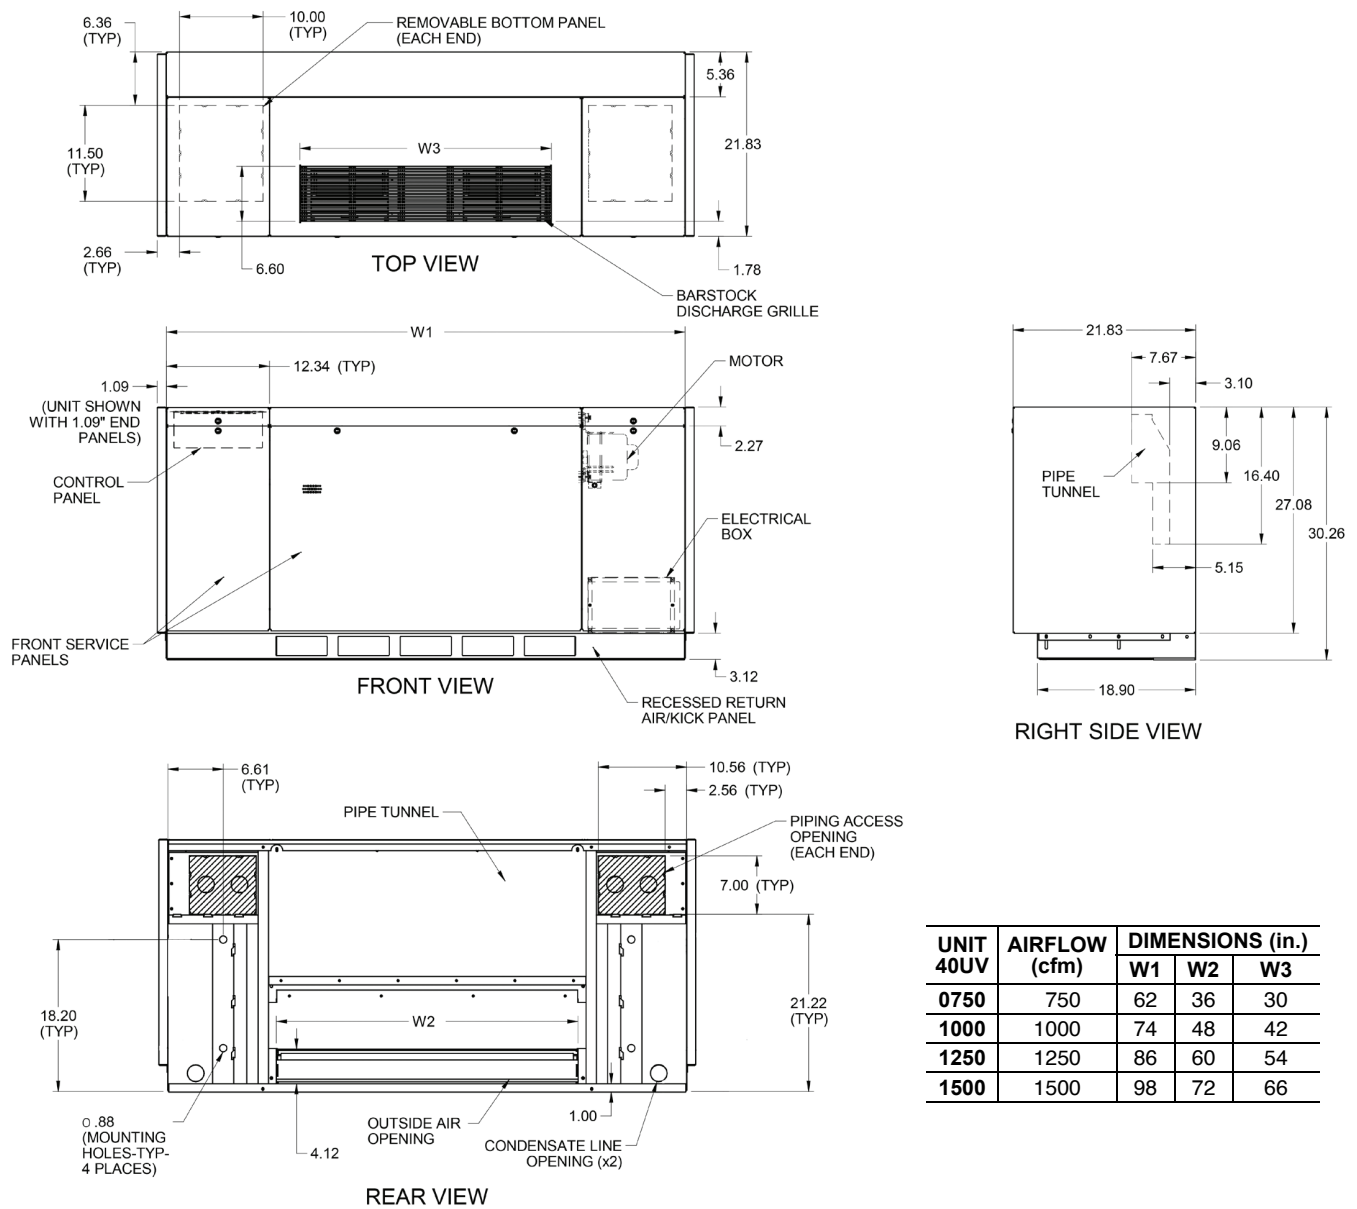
40UV Dimensions — 21-7/8 in. Depth —Floor Mounted Units
